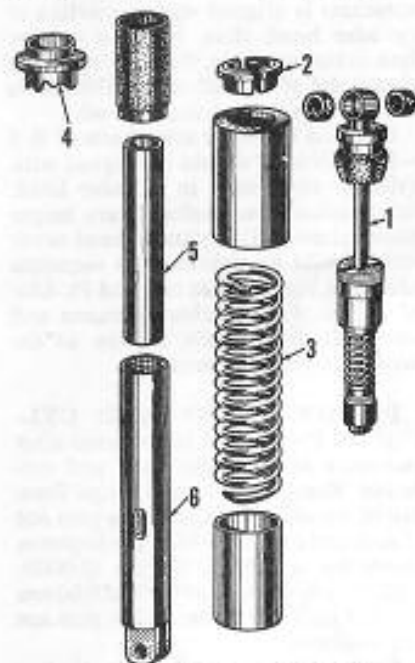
Exploded view of adjustable rear suspension unit used on CB and CL models.
